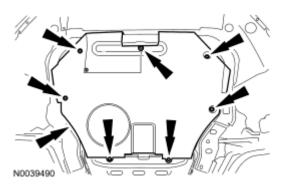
Locating Splash Shield Bolts Courtesy of FORD MOTOR CO.
